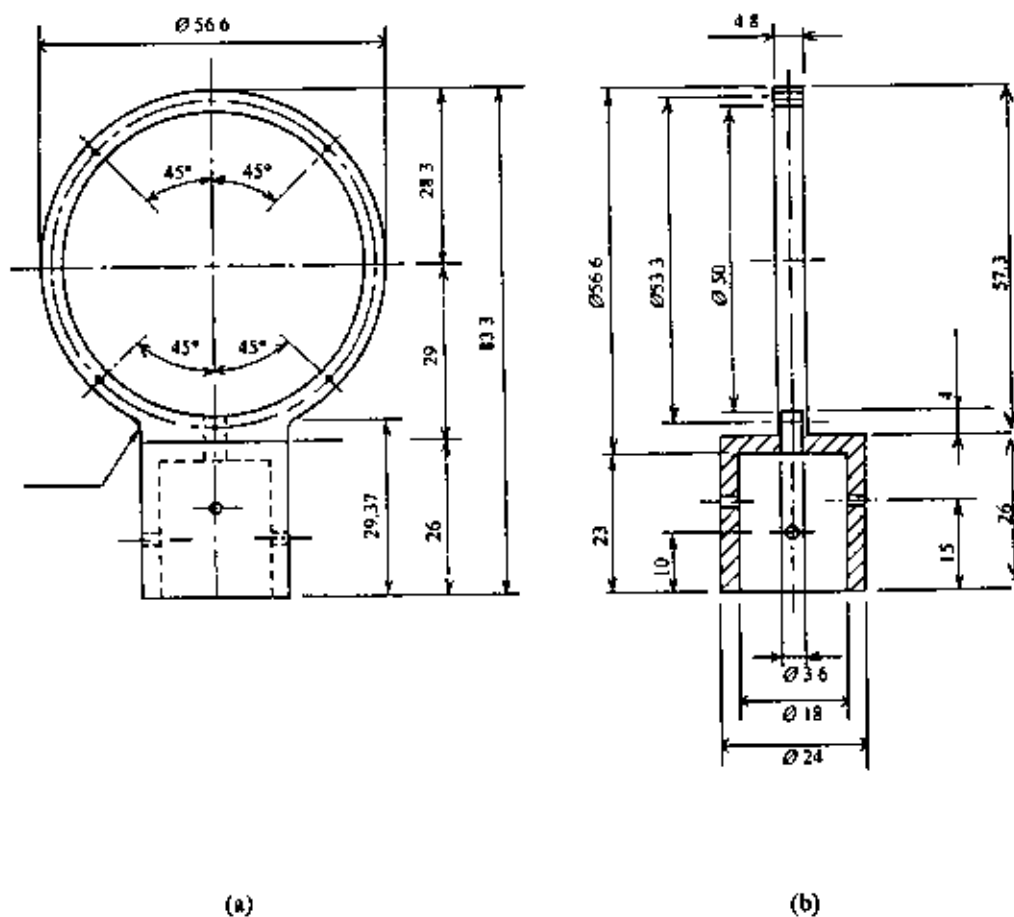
(a) Cross-sectional view and (b) lateral view of the P9A Ionization Chamber (all dimensions are in mm)
